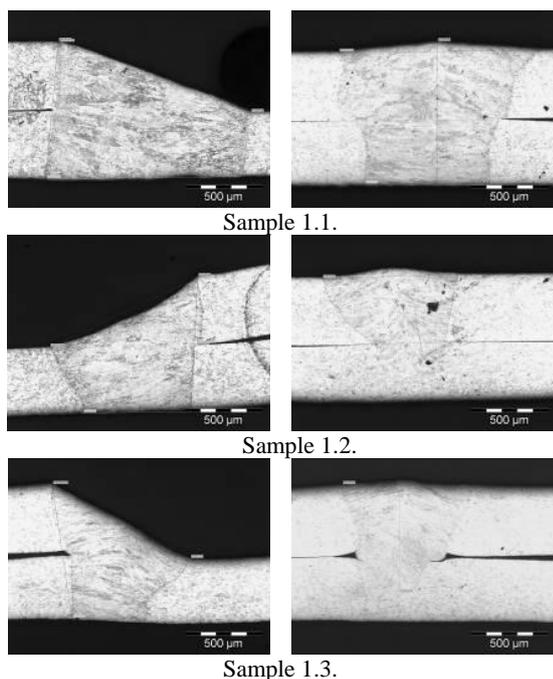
Section of welding tracks; left: fillet, right: overlapp
